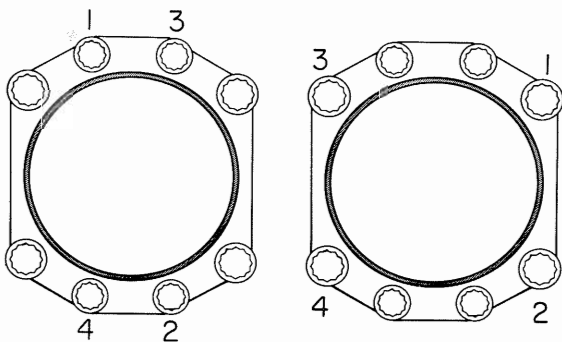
Sequence of tightening 3/8" Cylinder Base Nuts
